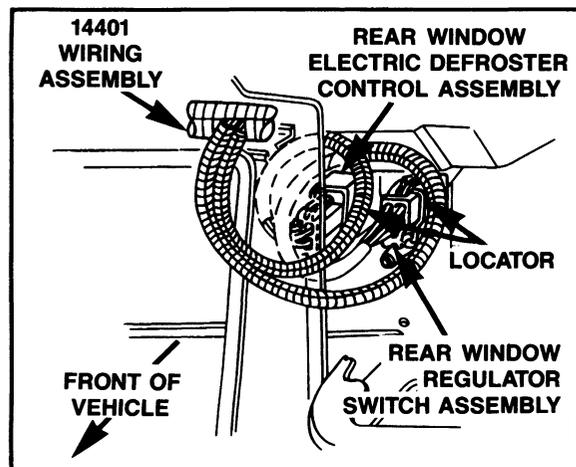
Rear Window Electric Defrost Control Wiring Installation and Rear Window Regulator Switch Assembly Wiring Installation
